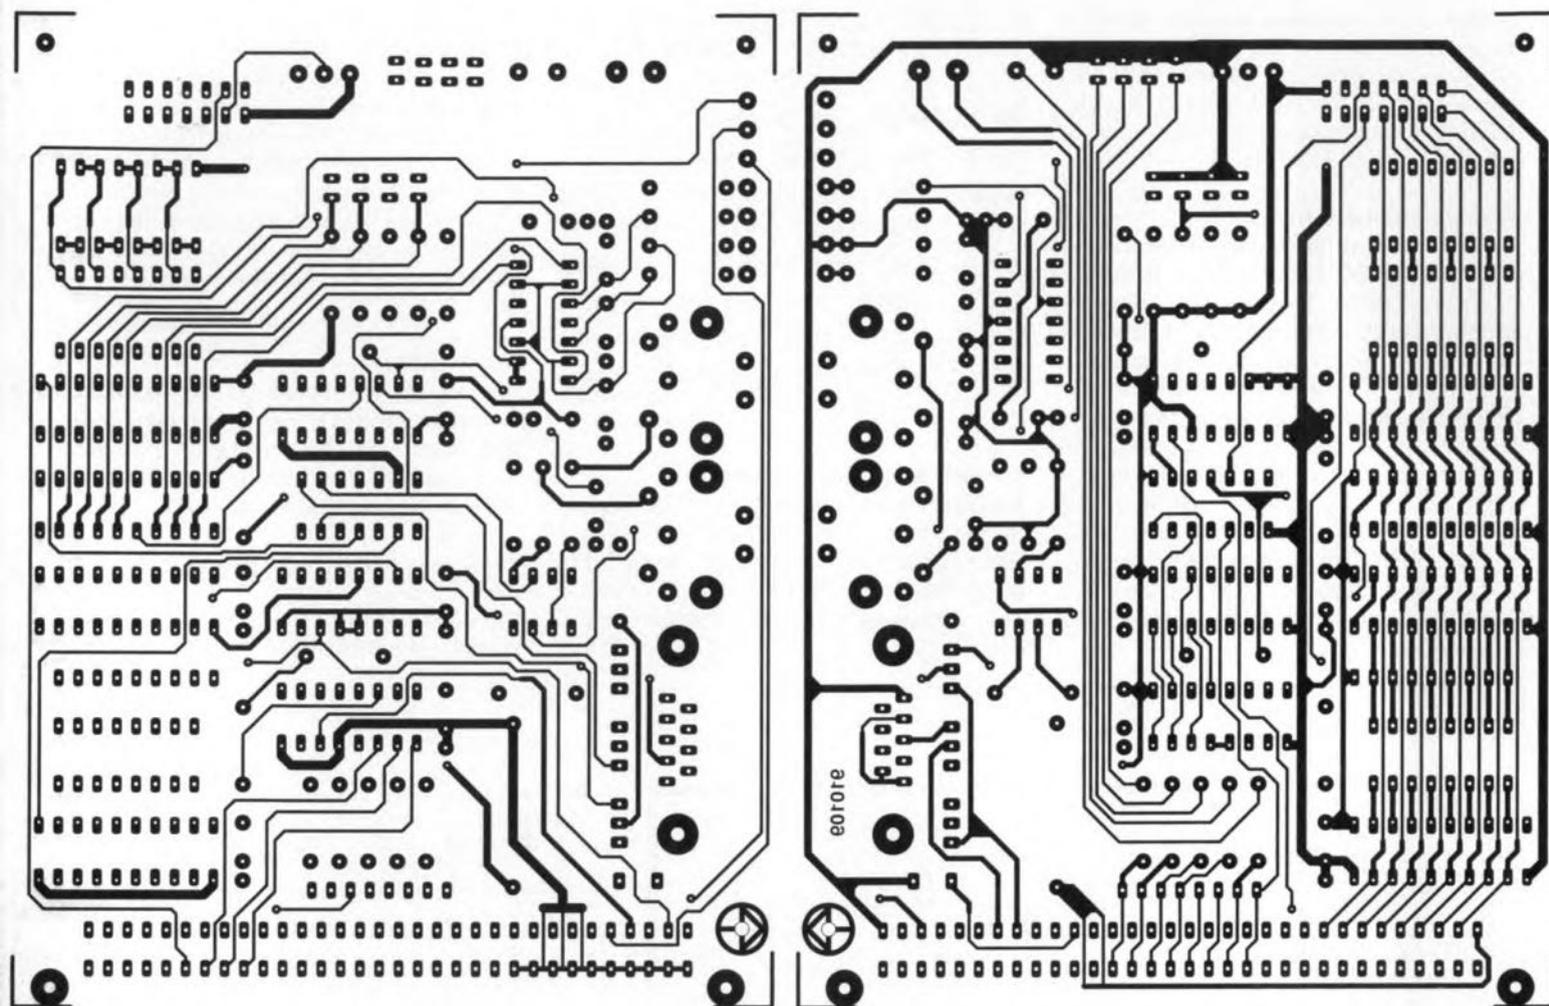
Track layouts (component side and solder side; mirror images) and component overlay of the printed circuit board.
